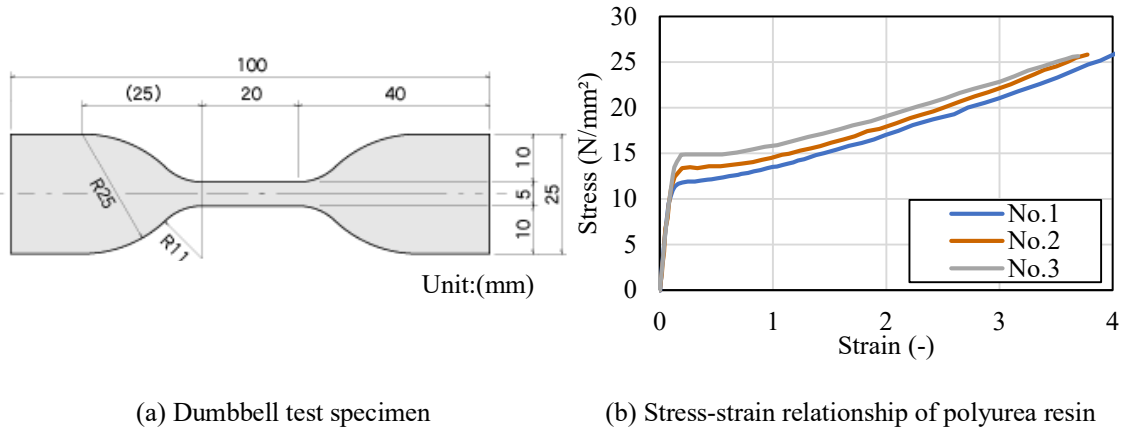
Uniaxial tensile tests using the dumbbell test specimen
